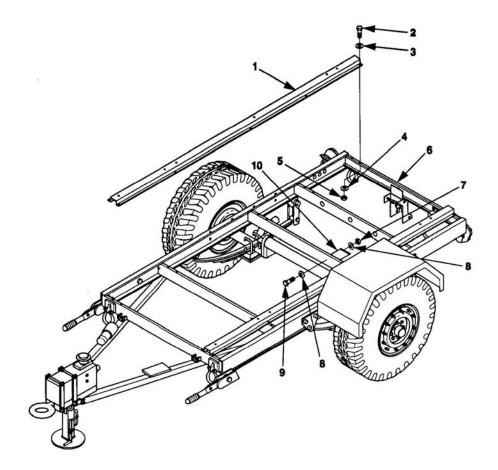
Generator Mounting Rails on 1 Ton Trailer.
